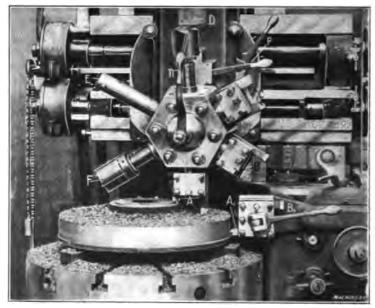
Turning a Gear Blank on a Vertical Turret Lathe
